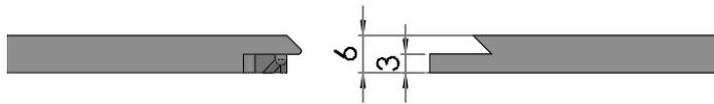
Dimension of 6mm dovetail flooring of side view
